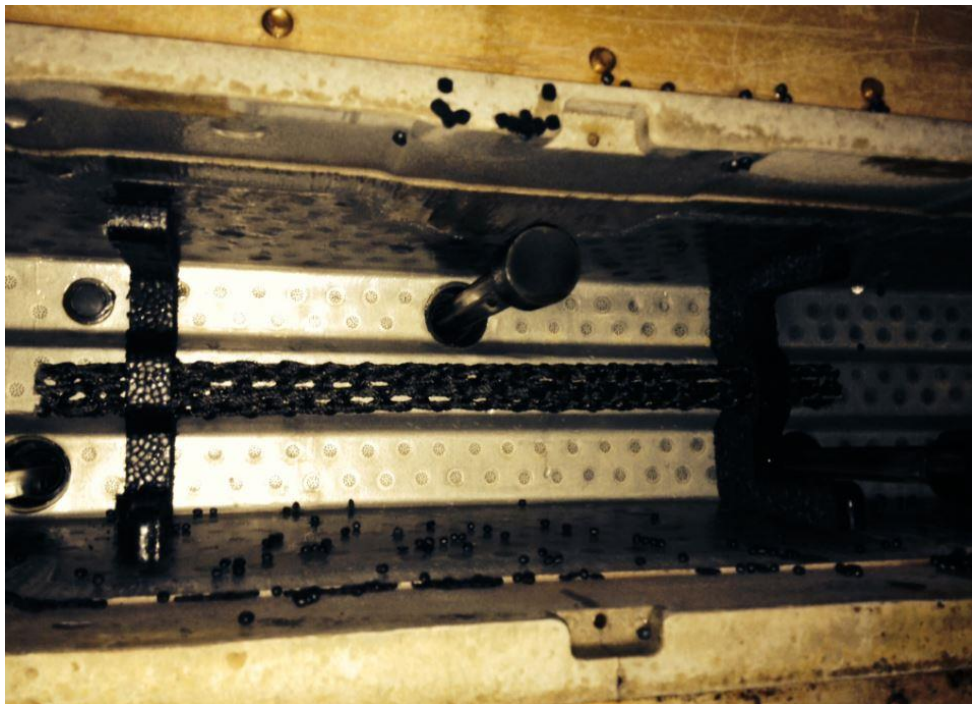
1 inch O-ACS held in supports placed in the mold of an EPP molding machine
